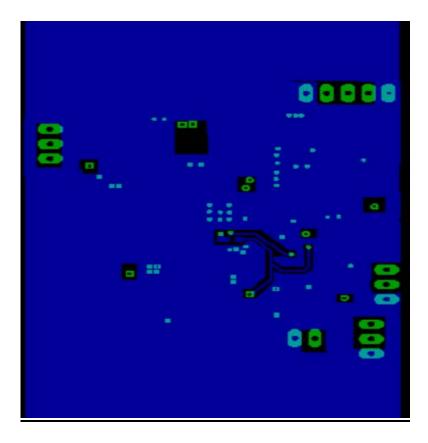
Bottom Layer of TRF 2436 PCB Design
